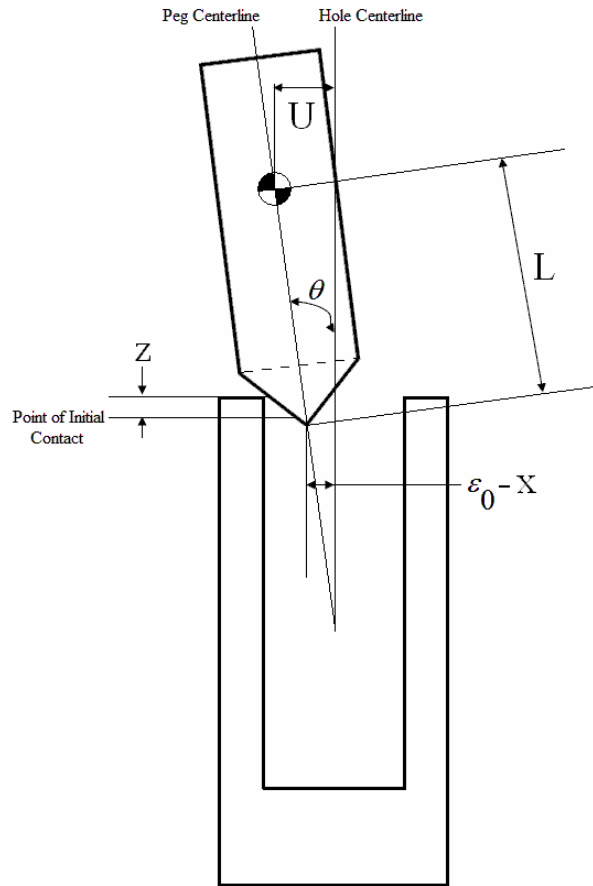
Peg and hole geometry during the chamfer crossing stage of peg and hole insertion.
